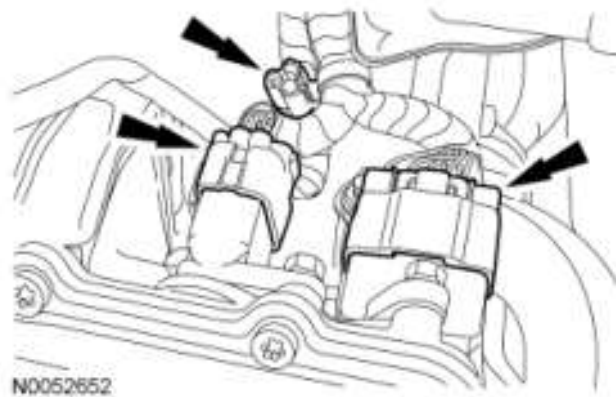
Locating Low Voltage Electrical Connectors And Engine Harness-To-Body Harness Retainer
